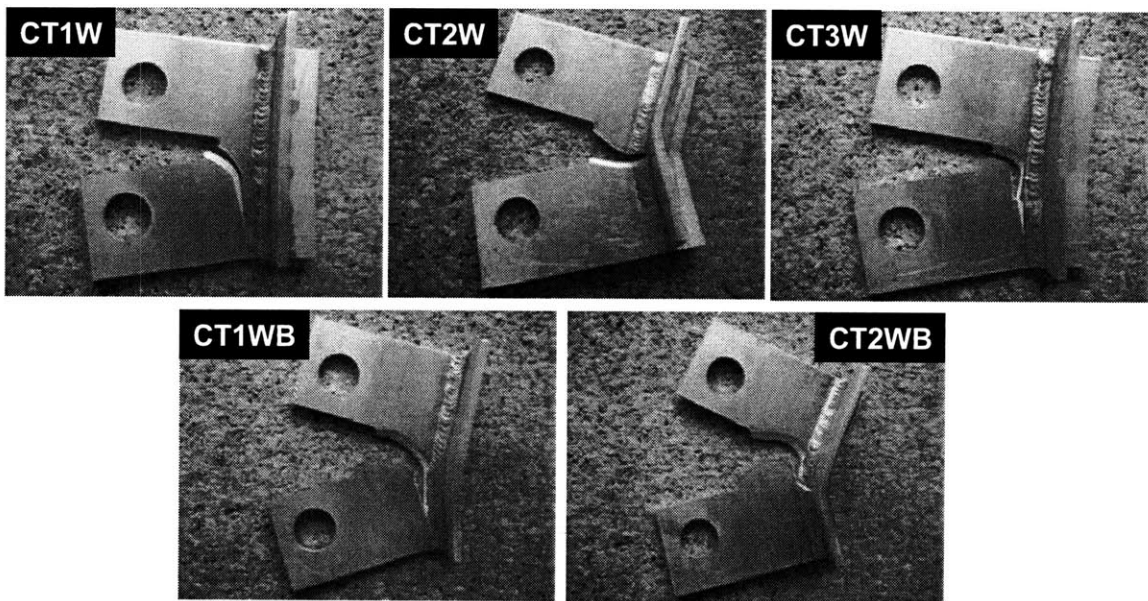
Final stage of stiffened CT specimen with welded flatbar stiffener. Note that the crack propagates through the stiffener in specimens labeled CT2W (enters through the weld while the crack reaches the stiffener) and CT2WB (enters through the weld with an angle during an initial failed attempt and while propagating opposite to the loading direction)
